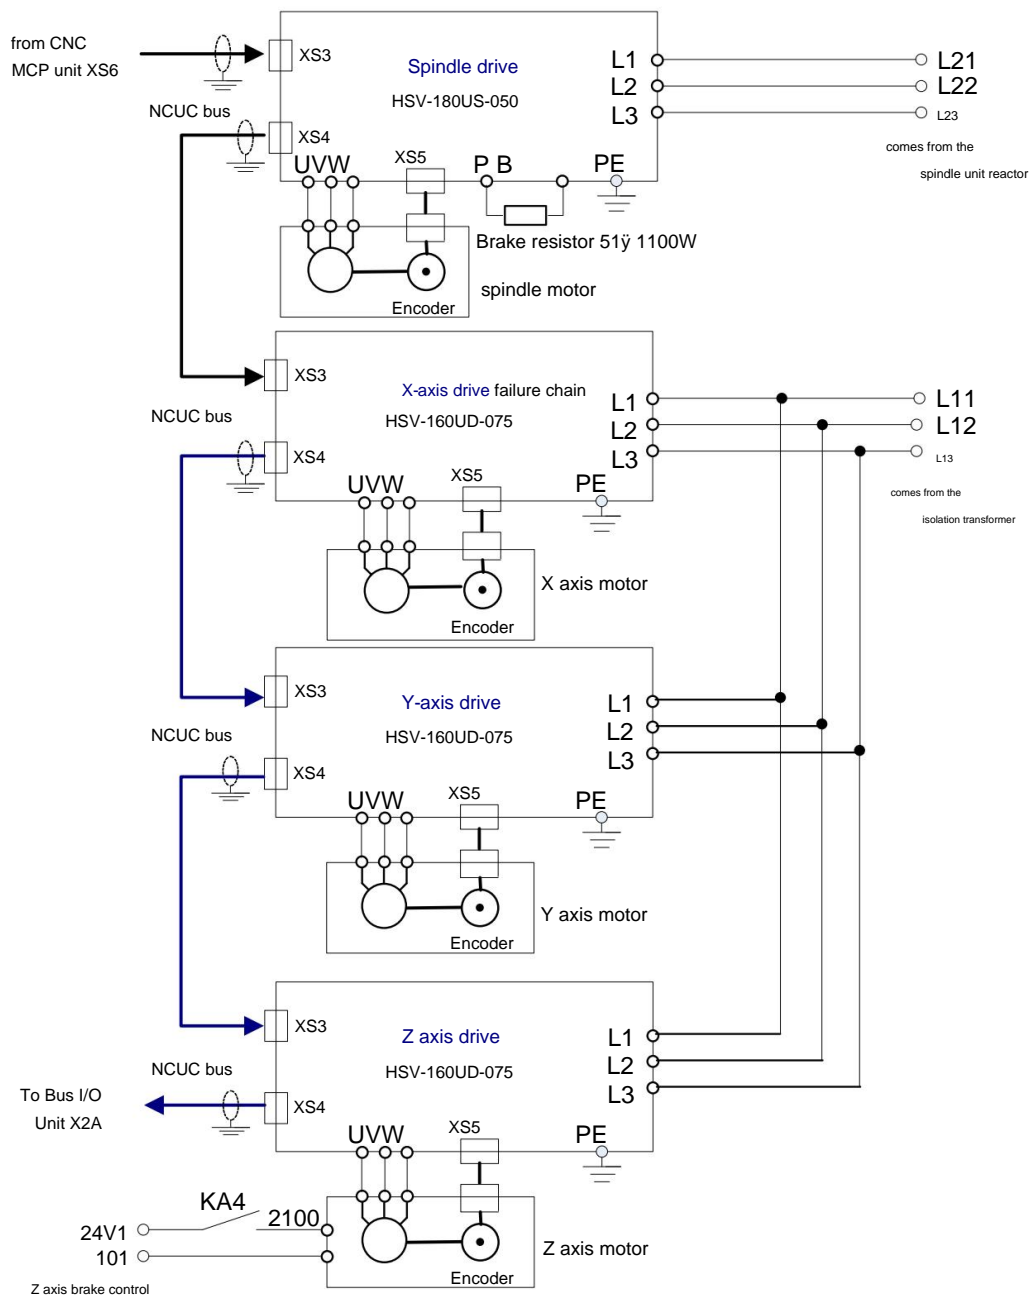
Electrical schematic diagram of typical CNC milling machine system - driver wiring diagram
